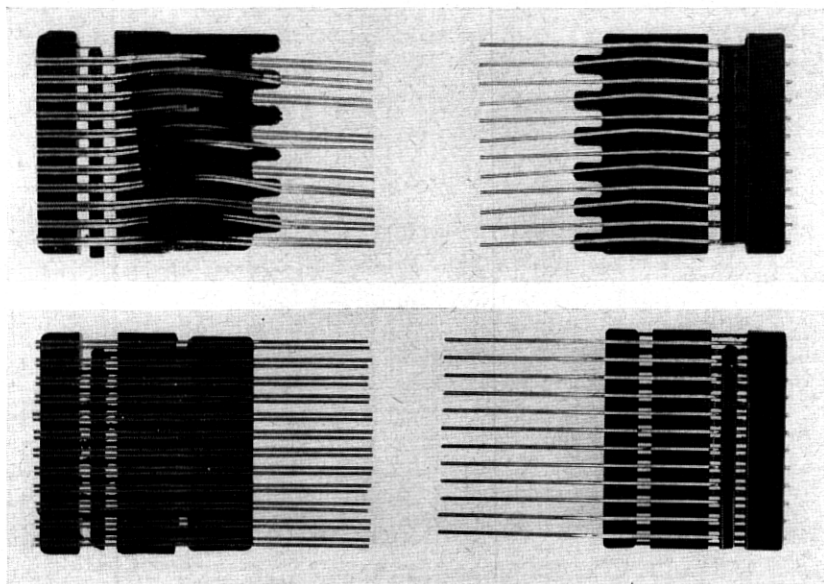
Cutaway sections of resin blocks showing inadequate versus adequate wire supports in molding die.
